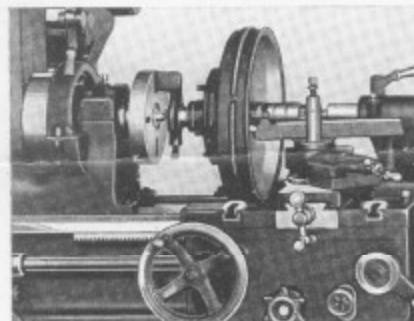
Truing the Brake Drum of a Demountable type Front Wheel.
